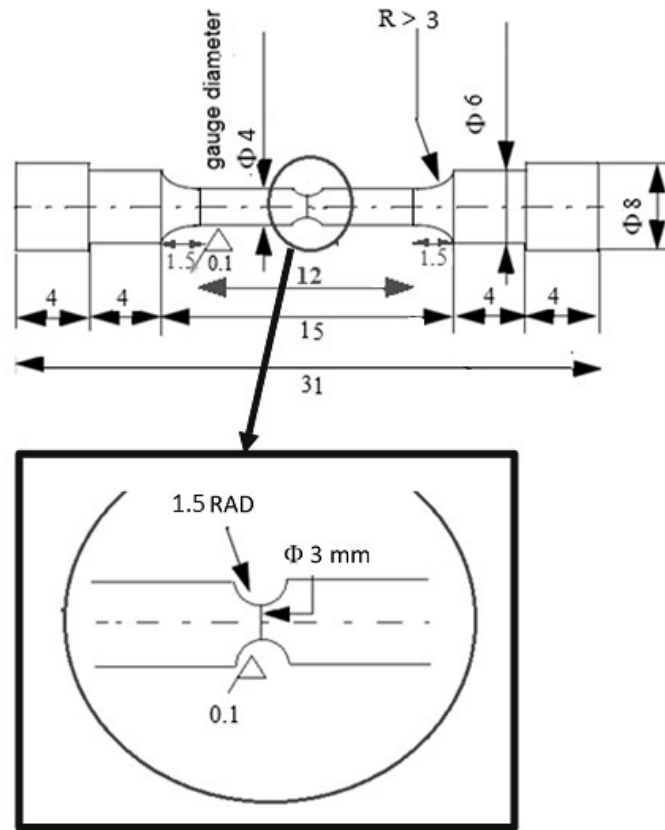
Schematic sketch of the tensile test specimens. Dimensions according to ASTM E8/E8M [194].
